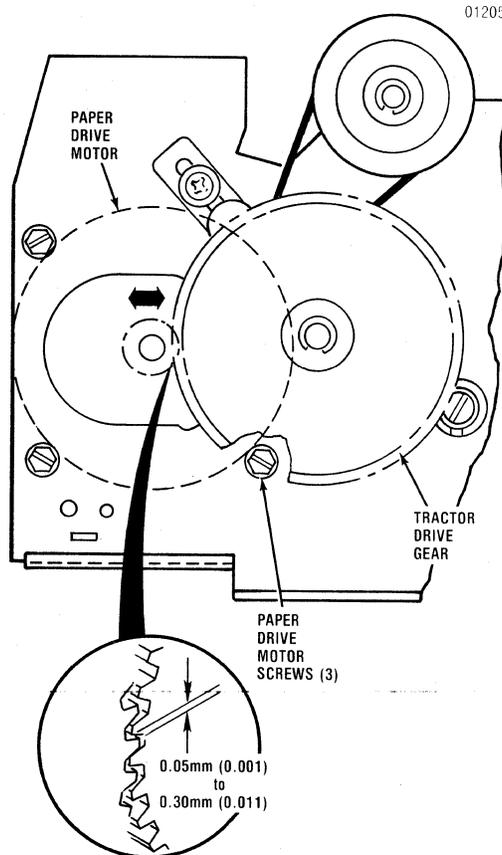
TRACTOR GEAR BACKLASH ADJUSTMENT
